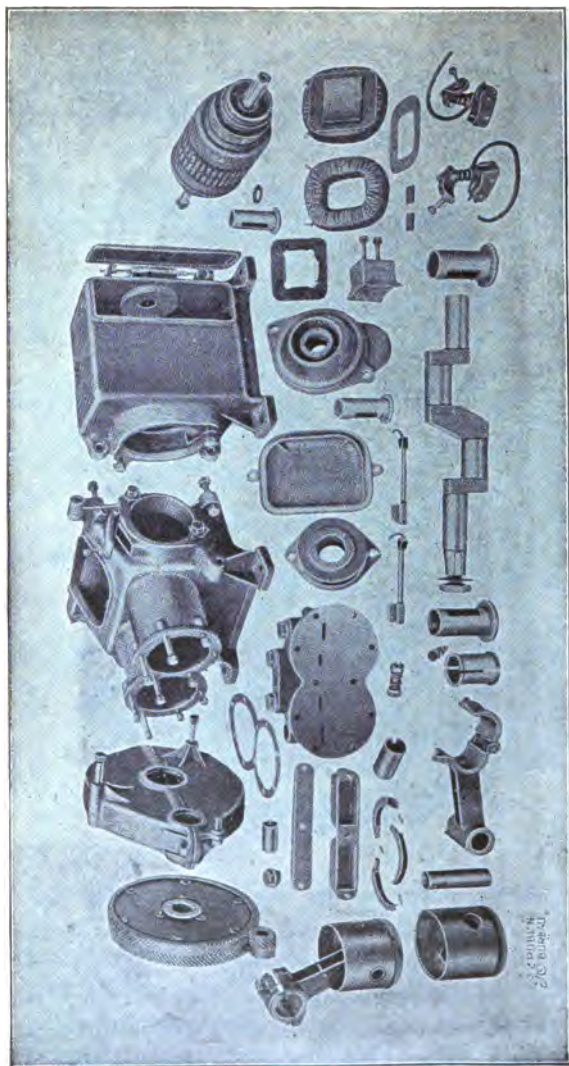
Parts of Motor Driven (Geared) Air Compressor.
